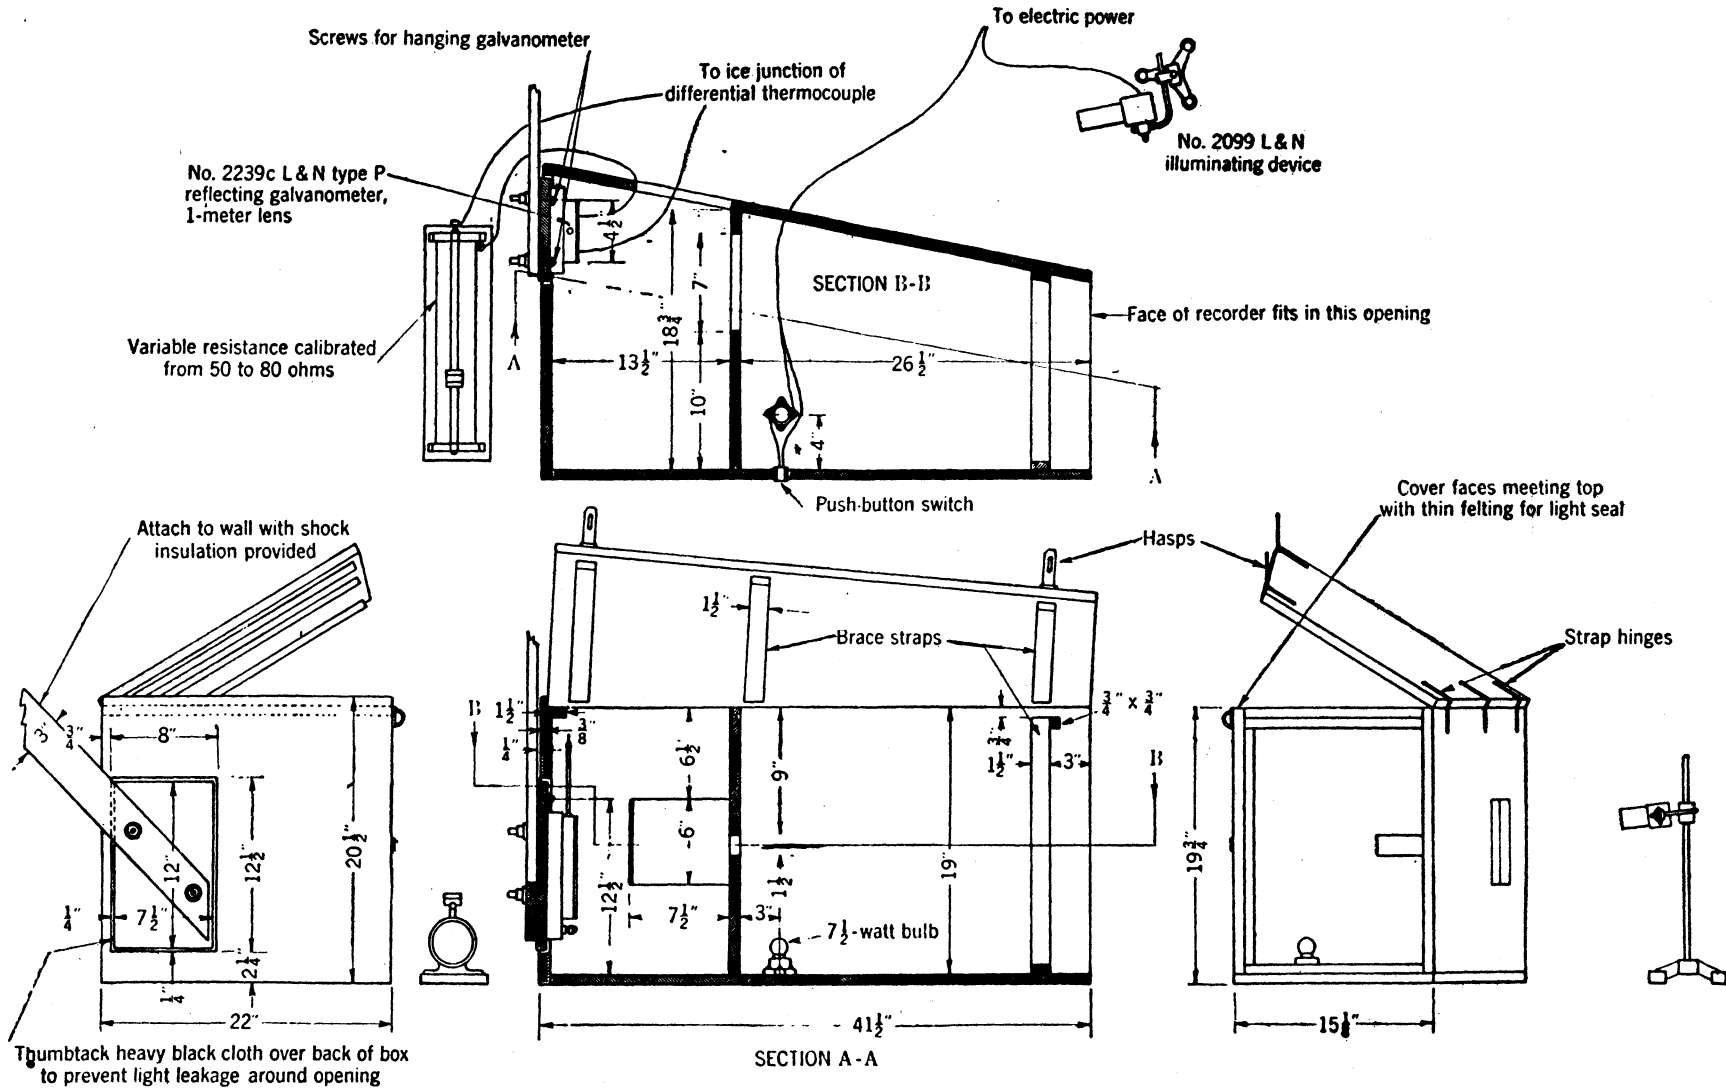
Construction details of housing for galvanometer and recorder.
